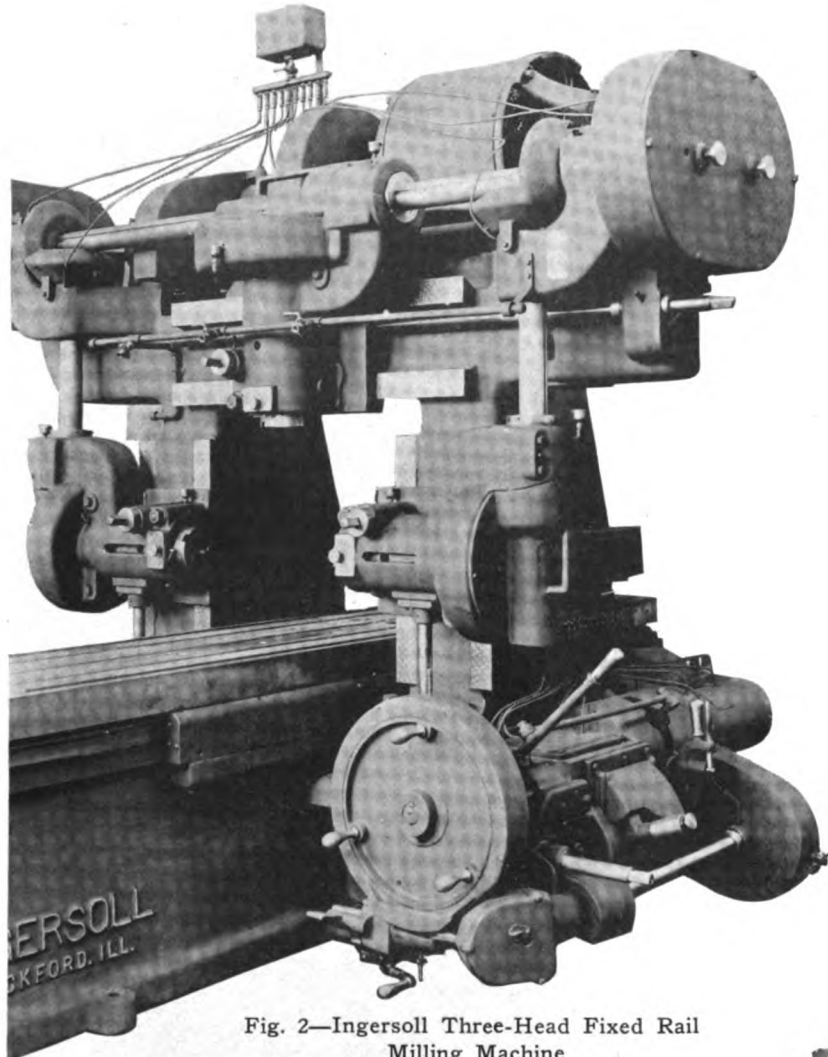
Ingersoll Three-Head Fixed Rail Milling Machine
